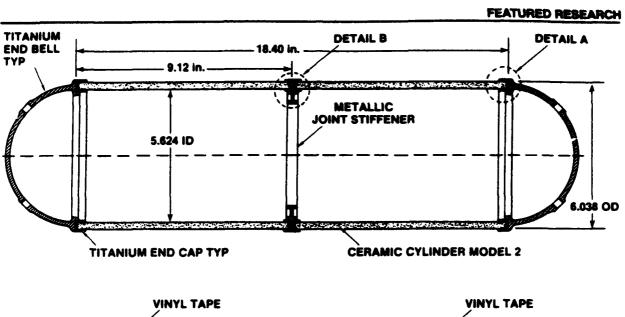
Joint stiffened ceramic housing assembly; Type Y; 2 cylinder sections Mod 2.
